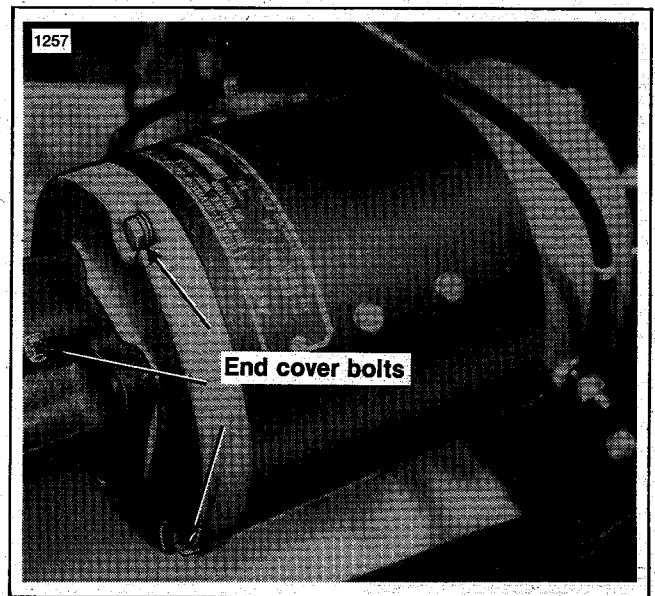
End Cover Bolts (3-AMF) (4-Hitachi)
